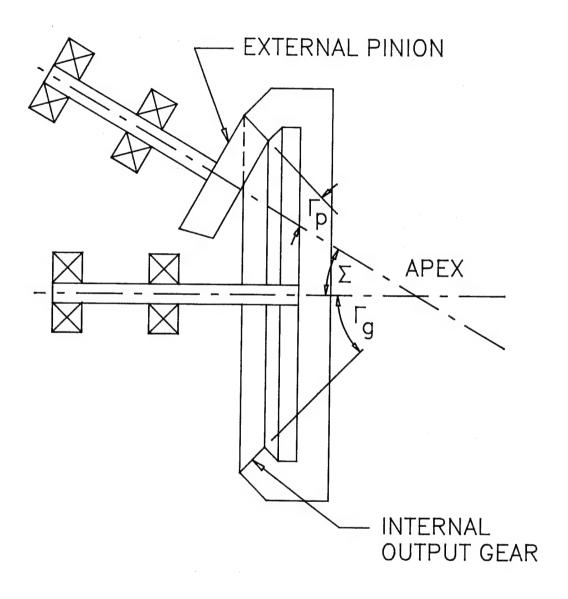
SPIRAL BEVEL INTERNAL OUTPUT GEAR
